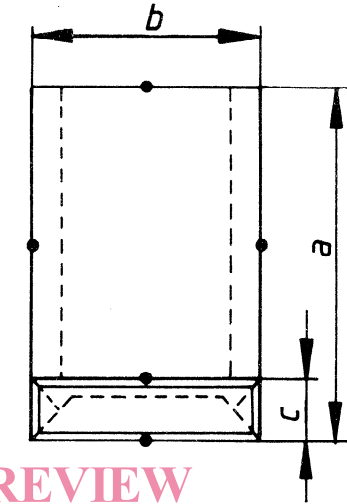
Open-mouth pasted gusseted rectangular bottom sack
